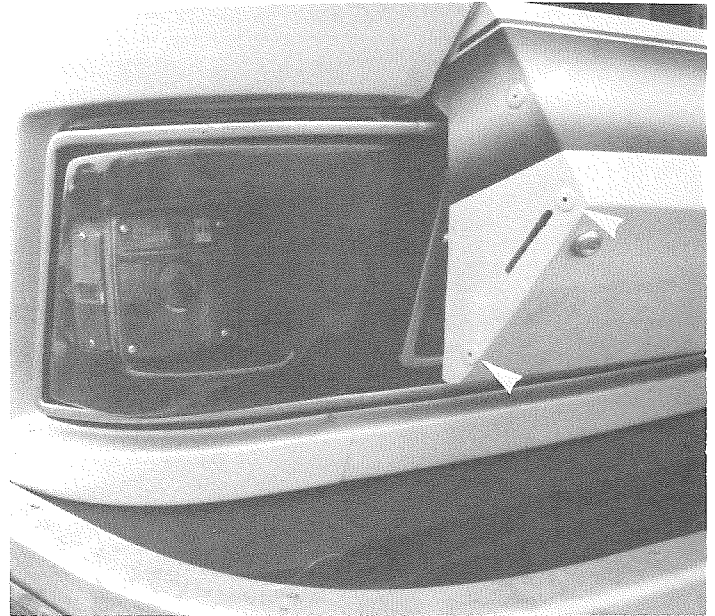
Exterior Engine Access Cover Removal: Remove the rivets that fasten the fiberglass cover to the hinge plate at either side. There are six (6) 30-AD66 BSLF pop rivets, .251-.375 grip length, .192-.196 hole diameter. These pop rivets may be drilled out.
